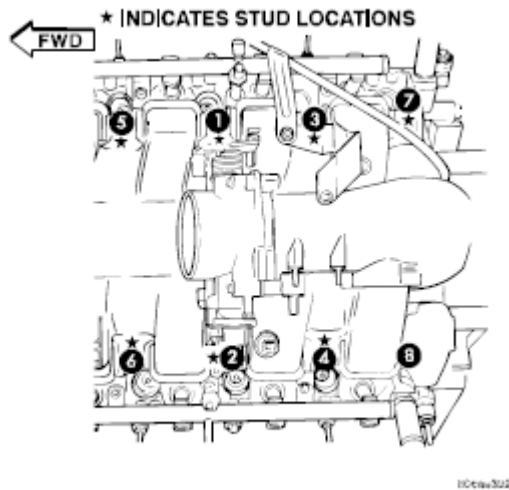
Identifying Removal & Installation Sequence Of Intake Manifold Retaining Bolts
